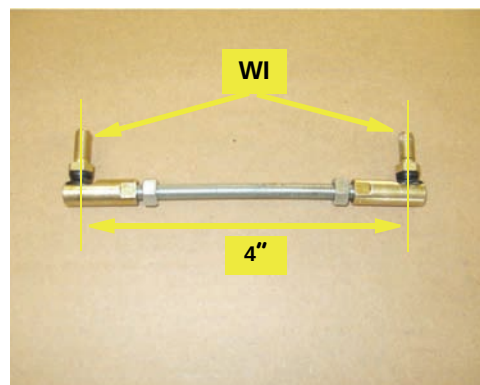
ii: Assembled threaded rod - 2nd axle type
